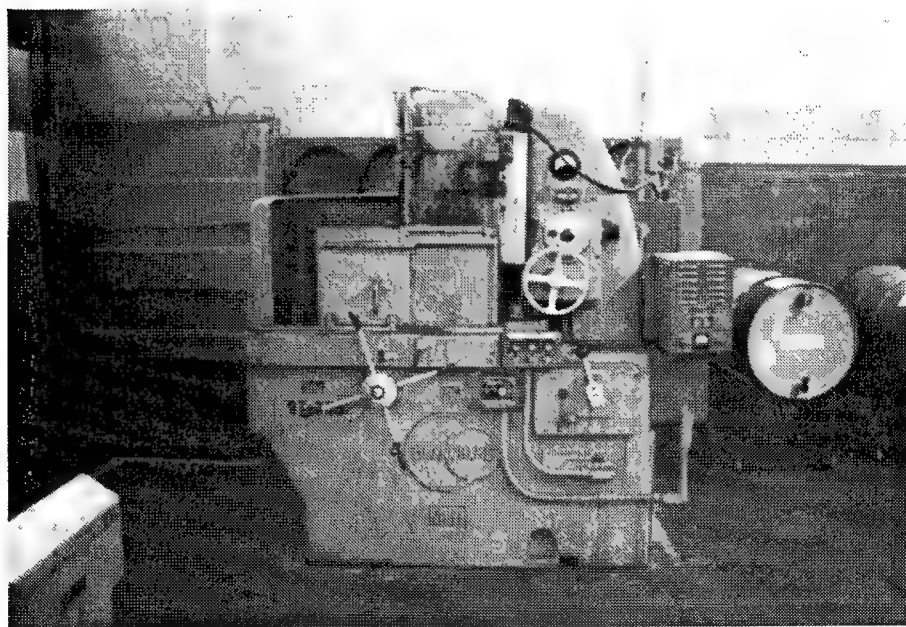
Building 3: Grinder with magnetic wheel located in the Machine Shop Area of Building 3. This machine was manufactured by the Blanchard Machine Co., Cambridge, MA.
